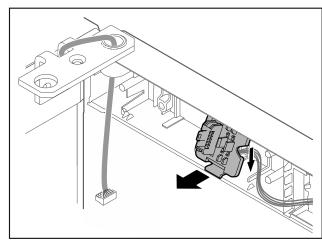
The installation position of the plug holder can be rotated by 180°.
